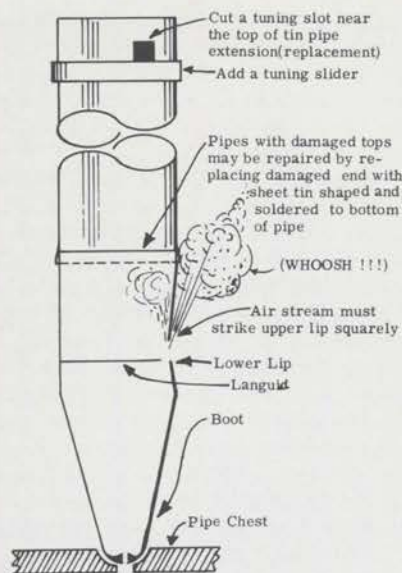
Metal pipe repair (shows languid, upper and lower lips which may be adjusted to direct air).
